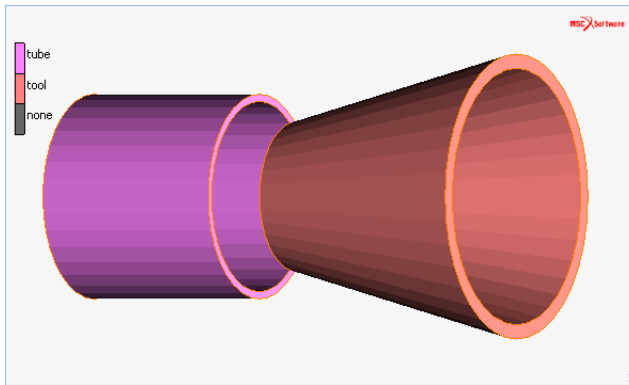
Cylindrical Tube and Flaring Tool
